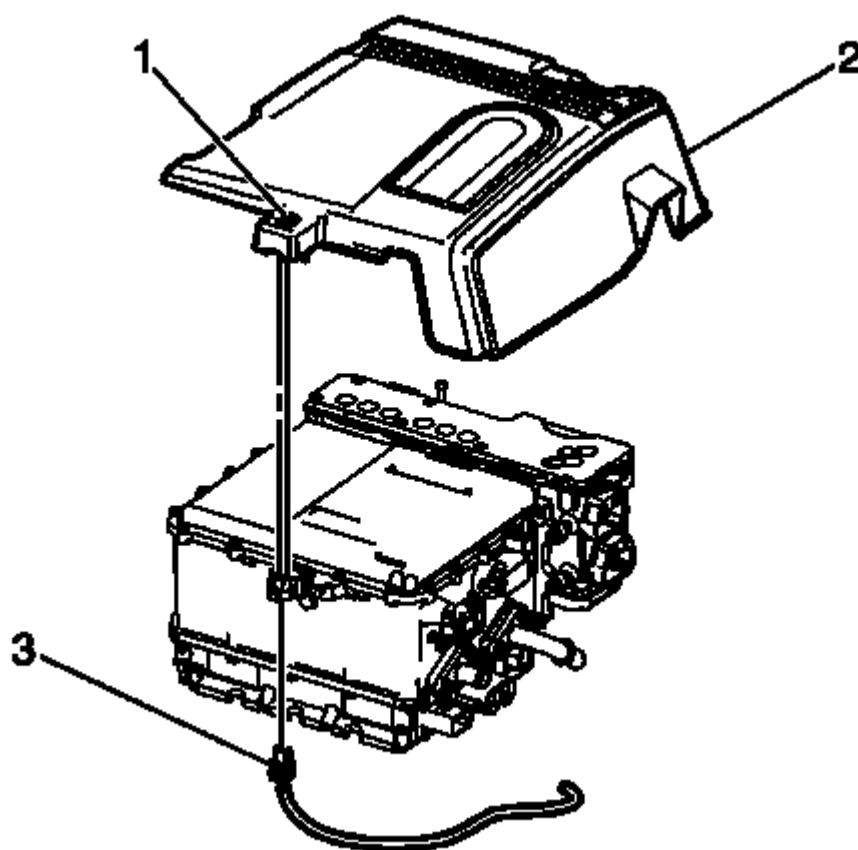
Drive Motor Generator Power Inverter Module Cover, Bolt And Electrical Connector
